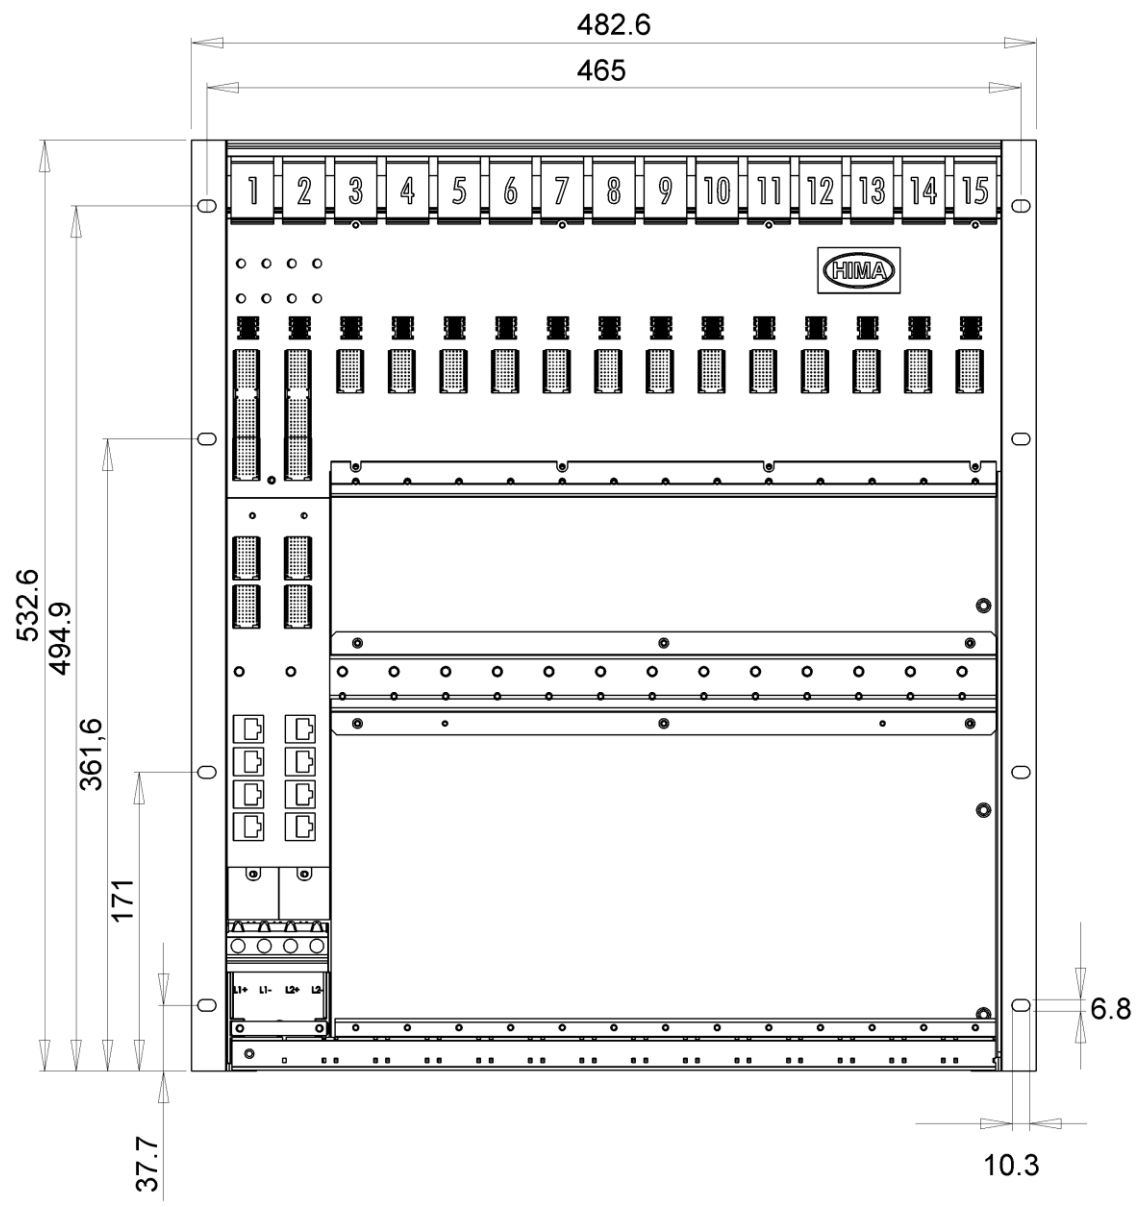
Dimension Drawing of X-BASE PLATE 15 32
